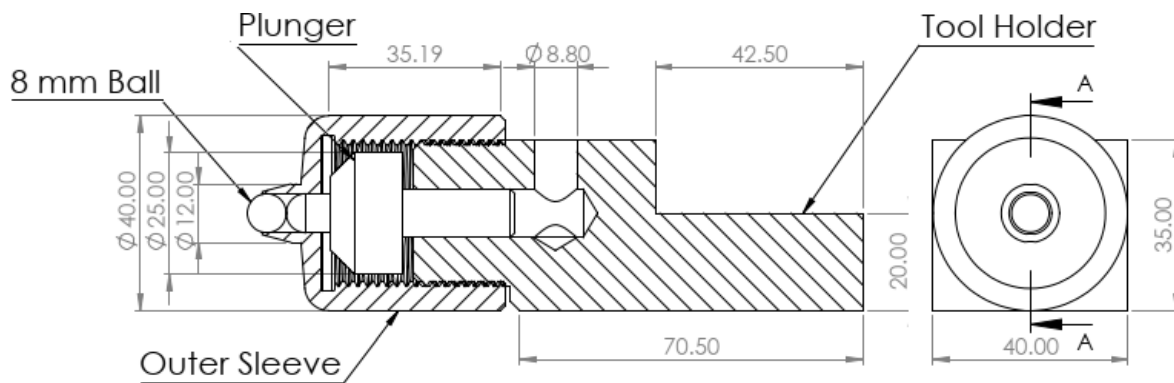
Pneumatic burnishing tool assembly with automated air-driven motor to precisely control burnishing parameters.
